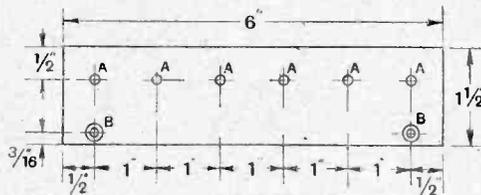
Terminal strip. Sizes of holes are as follow: A, 5/32in. (4 B.A. clearance); B, 1/8in., and countersunk for No. 4 wood screws.
